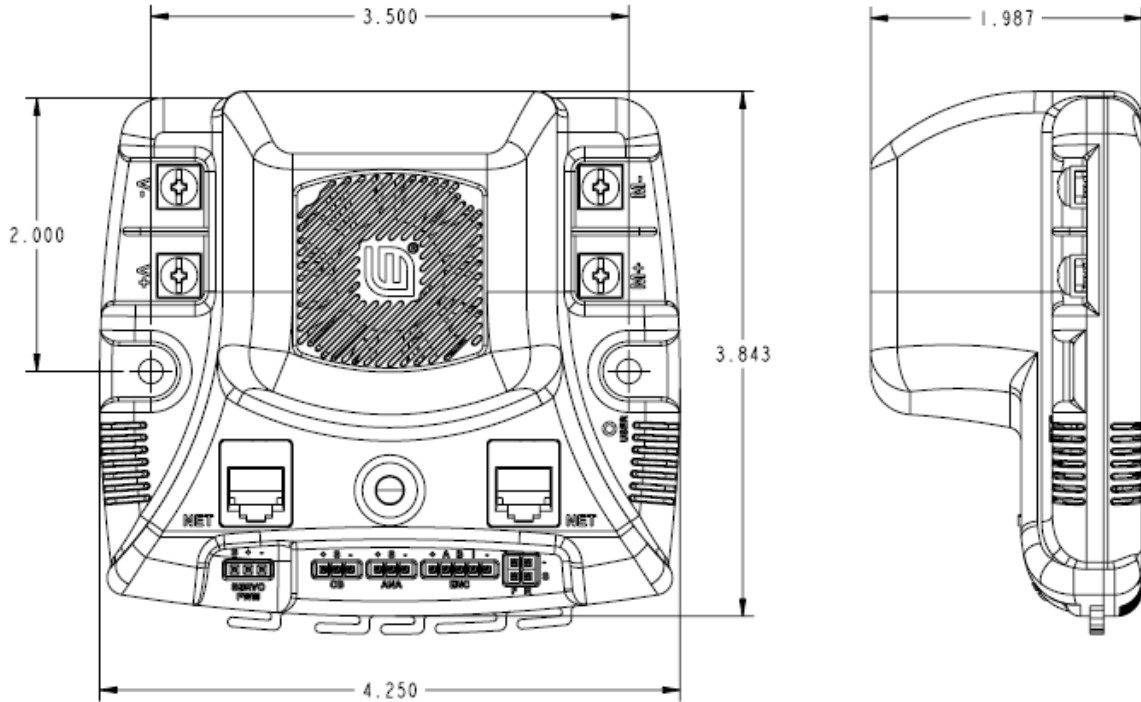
shows the MDL-BDC physical dimensions. The module has two 0.175" (4.5 mm) diameter mounting holes as indicated.
